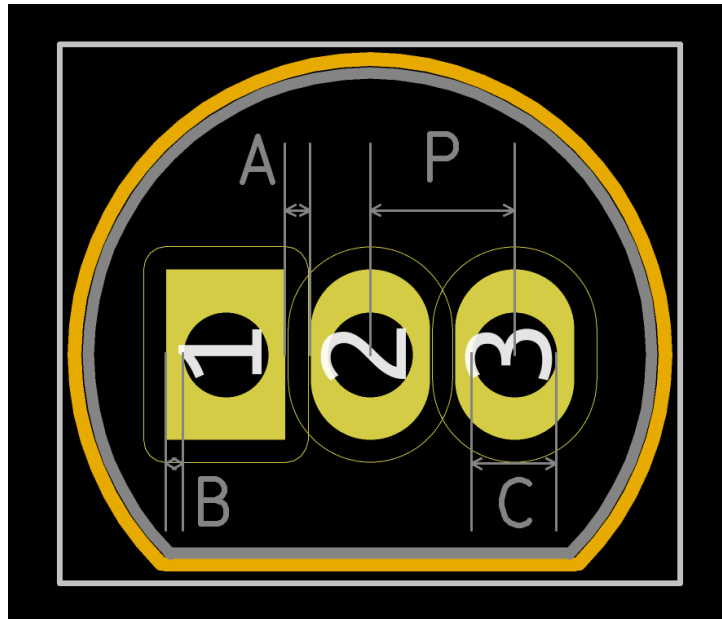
THT footprint with pin pitch (P), copper to copper clearance (A), minimum annular ring (B) and hole diameter (C) indicated.
